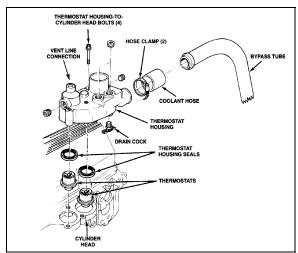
THERMOSTAT AND RELATED PARTS 05034
